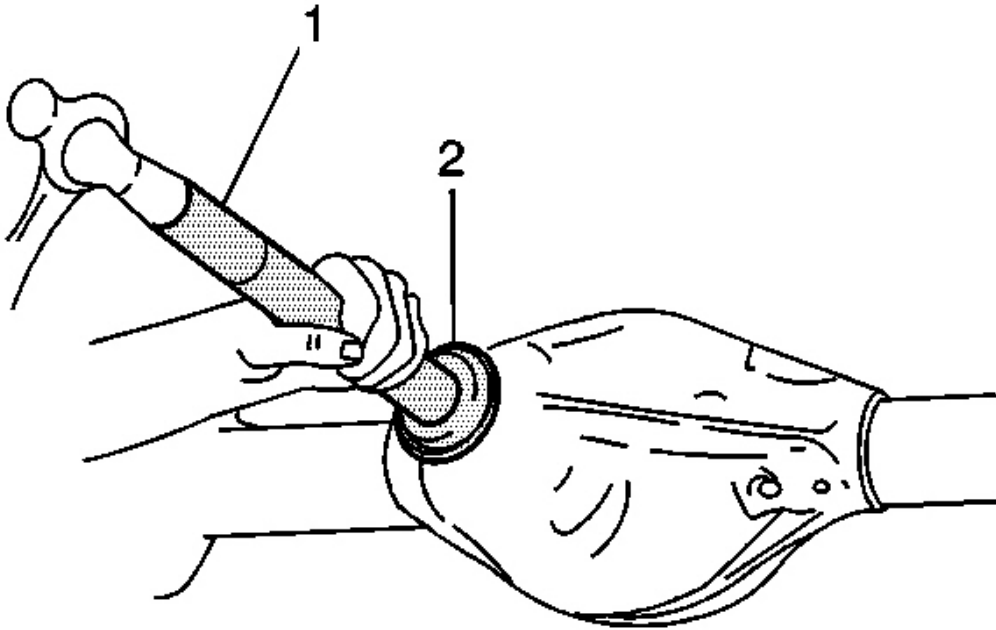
Installing Outer Pinion Bearing Cup Using J 7818 & J 8092
